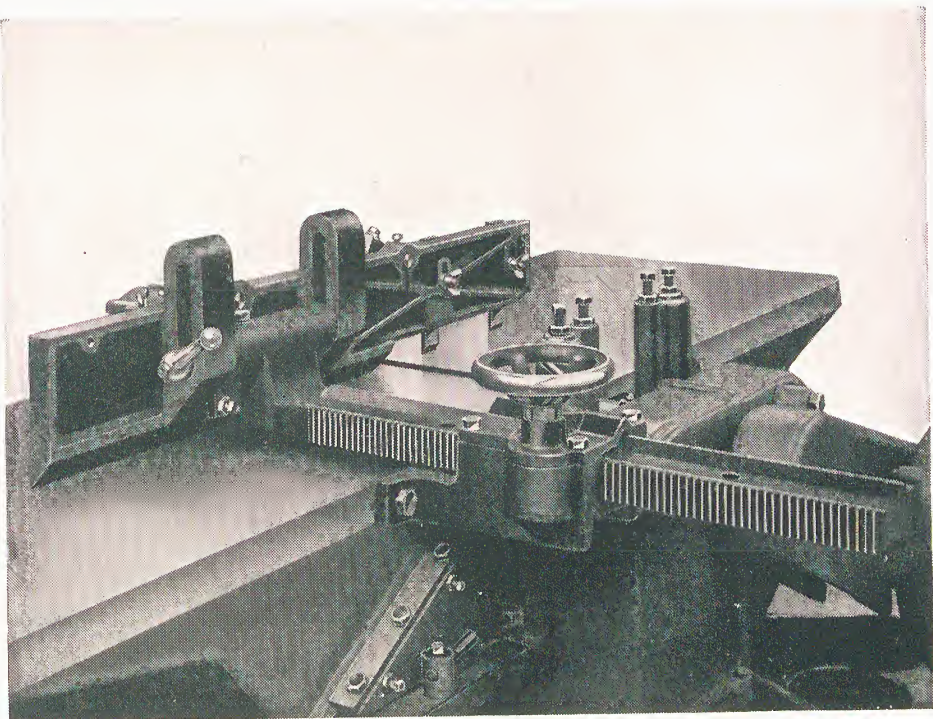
TWO DETAILS OF DOMINION "AB" COMBINED SURFACING AND THICKENING MACHINE.
